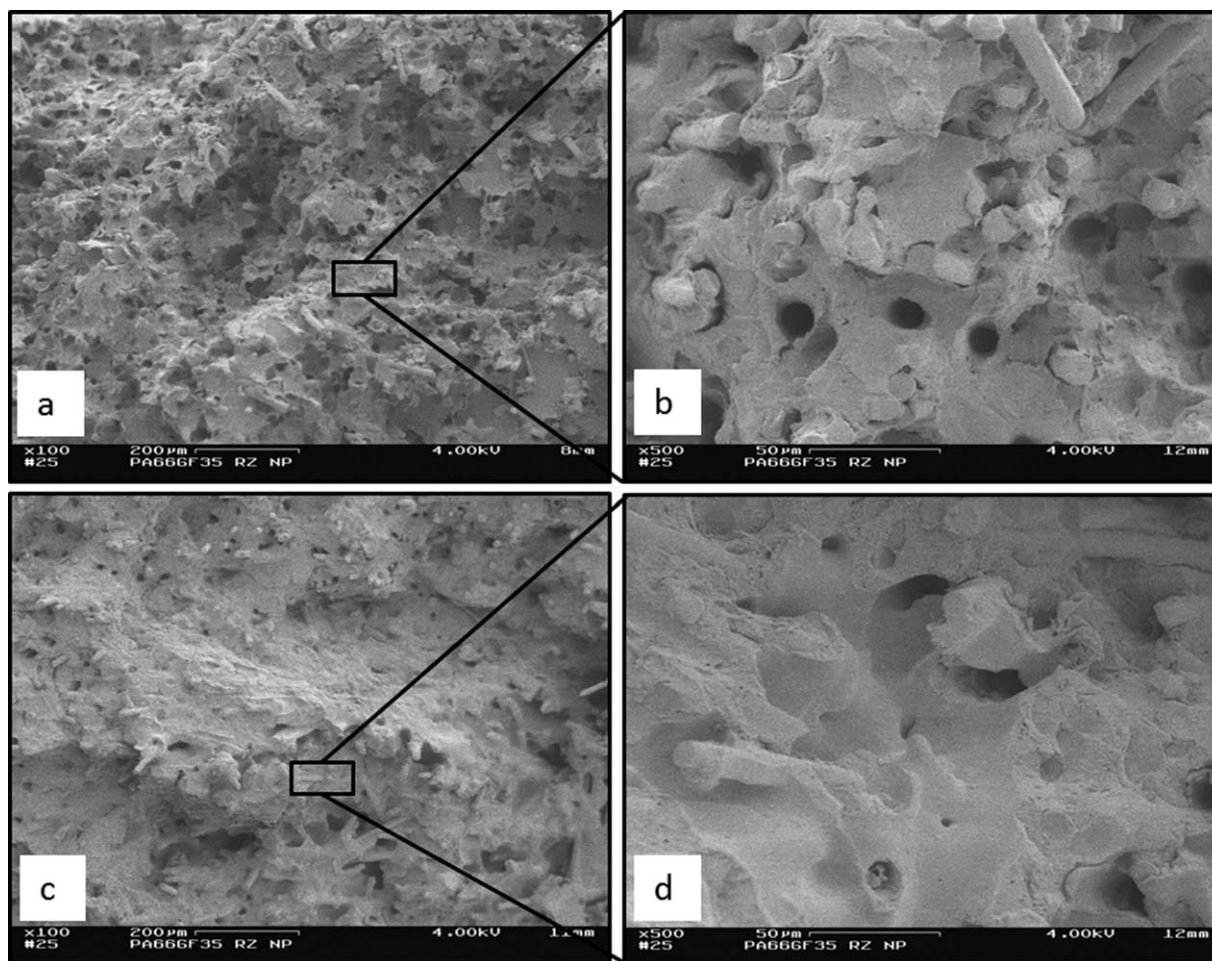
Fracture surface of PA6.6-GF35 standardized fatigue specimen without weld line at RT, $\sigma_a = 45 \text{ N mm}^{-2}$, $R = 0.1$, $N = 425696$ (shear and core layer): a) shear layer with 100 \times magnification, b) shear layer with 500 \times magnification, c) core layer with 100 \times magnification, and d) core layer with 500 \times magnification.
